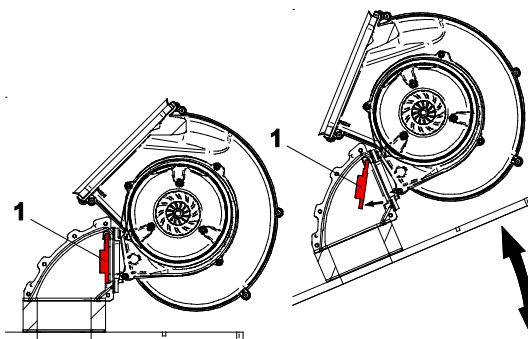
Exposed Combustion Chambers under Burner Modules
